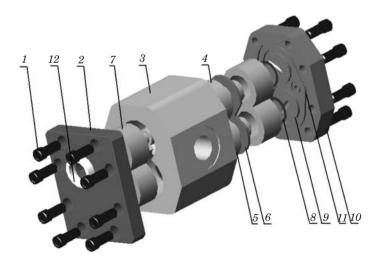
Demonstrative drawing of the PZ2 type gear pump structure: 1 – bolts, 2 – front end plate, 3 – casing, 4 – driving wheel (drive gear), 5 – driven wheel (idler gear), 6 – resistance filler (compensation), 7 – bearing sleeve, 8 – thrust ring, 9 – seal under the driven wheel, 10 – rear end plate, 11 – large seal (stadium), 12 – Shaft end seal
